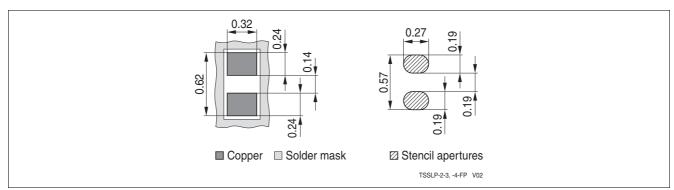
TSSLP-2-4 Footprint (dimension in mm)
